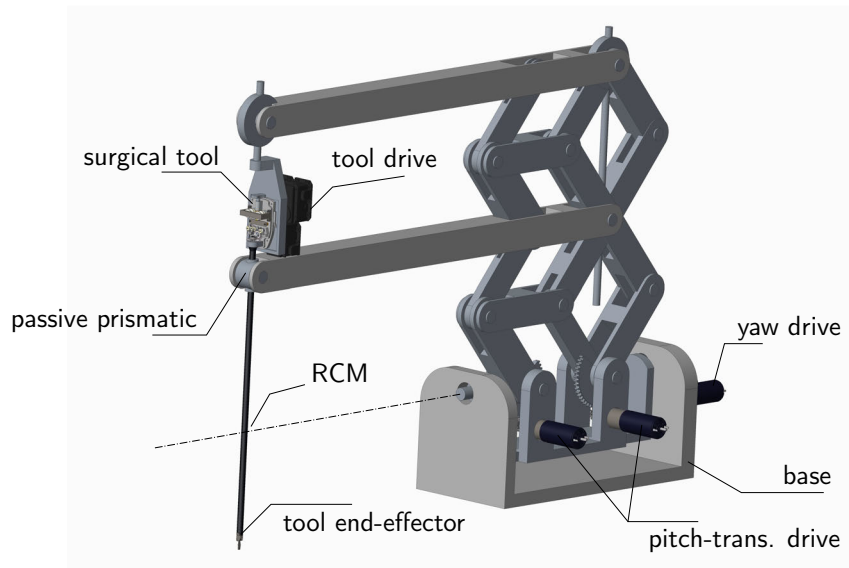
CAD Design: Based on the multi-DoF RCM presented (Chap. 5), the manipulator has a surgical tool to accomplish the desired surgical tasks.
